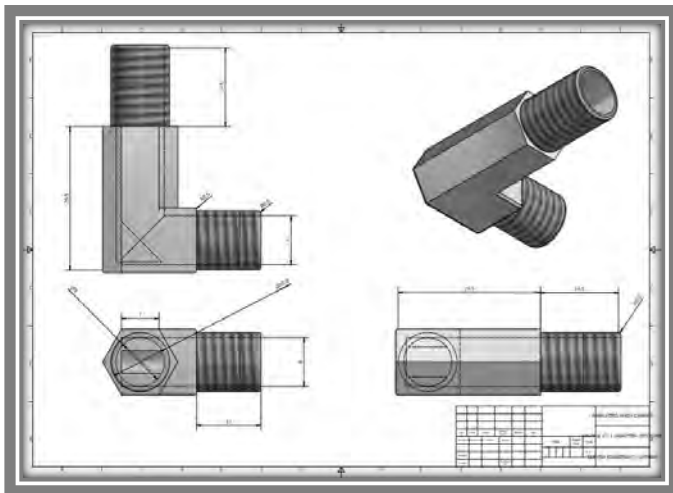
, SN 29&37: L-Adapter for Main and Movable Wheel Pistons
